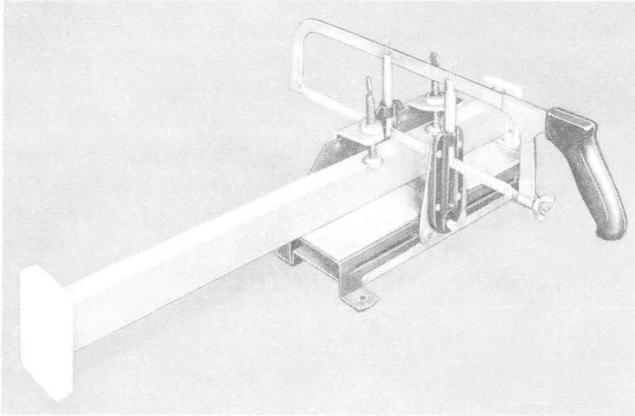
Waveguide Section Clamped in Position with Hacksaw Assembled
